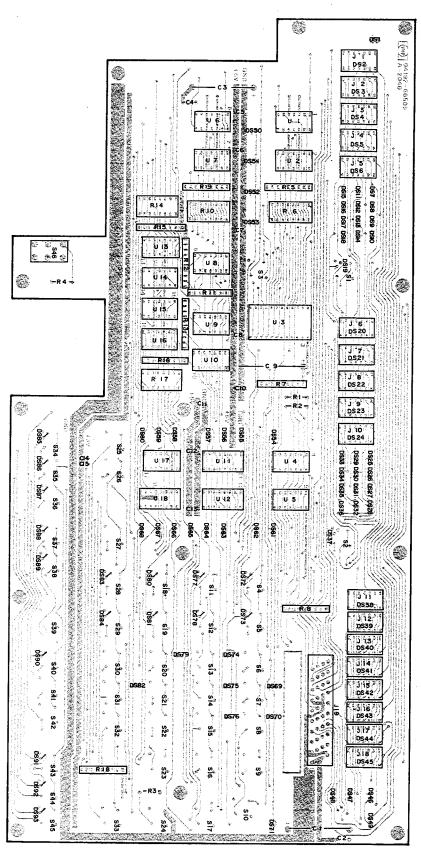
A5 Display and Keyboard Control Board Assembly Component Locations.
